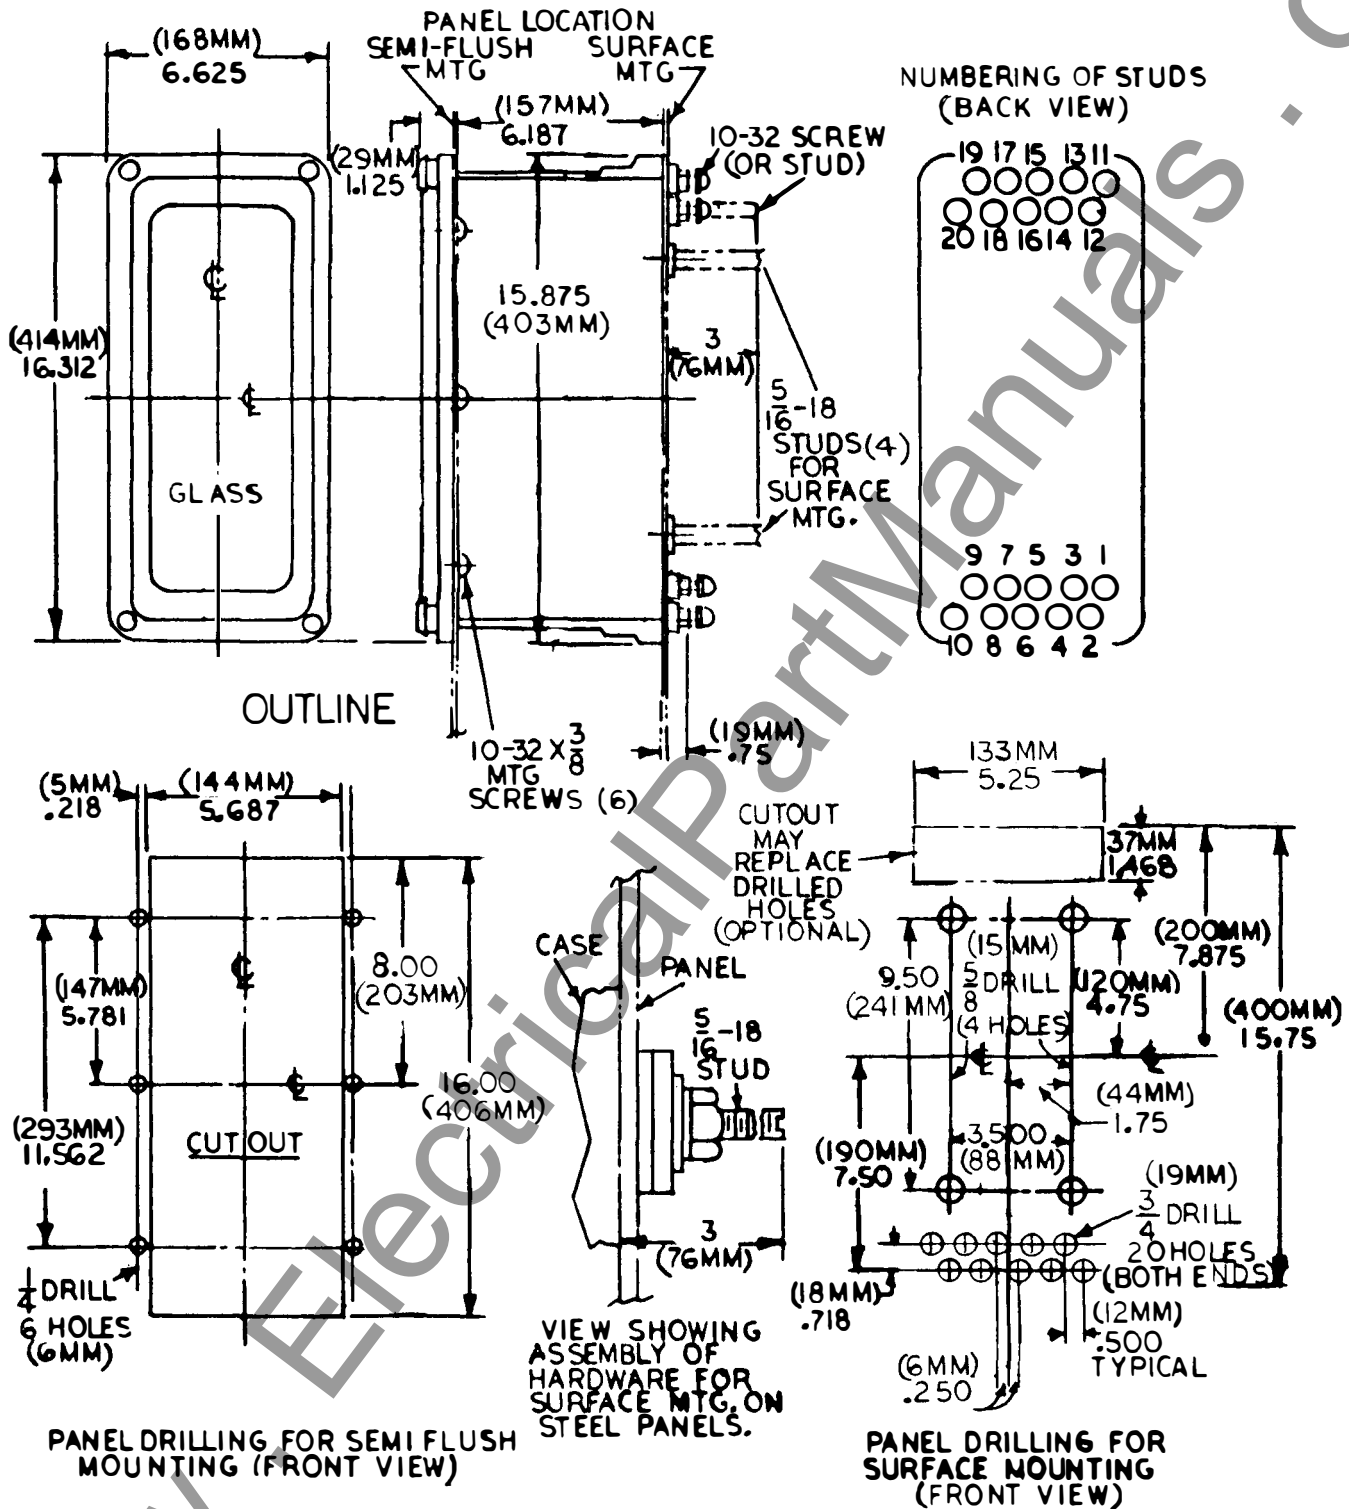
(K-6029274-4) Outline and Panel Drilling - M2 Case
